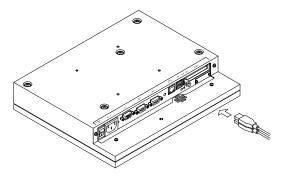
Attaching the USB cable removal prevention clamps < 1/3 >
